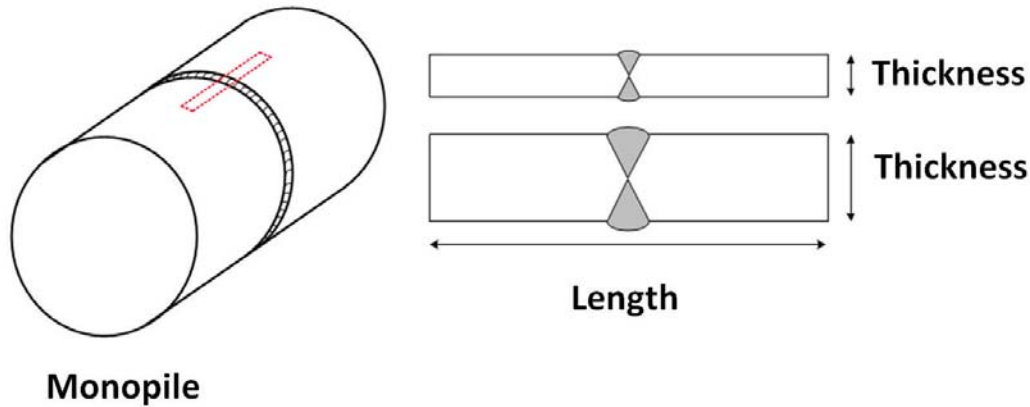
Weld thickness and weld location at the wind turbine.
